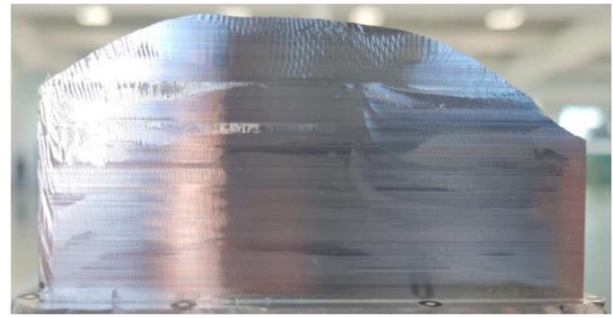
Thin-walled part after milling by end mill with helix angle 25°
